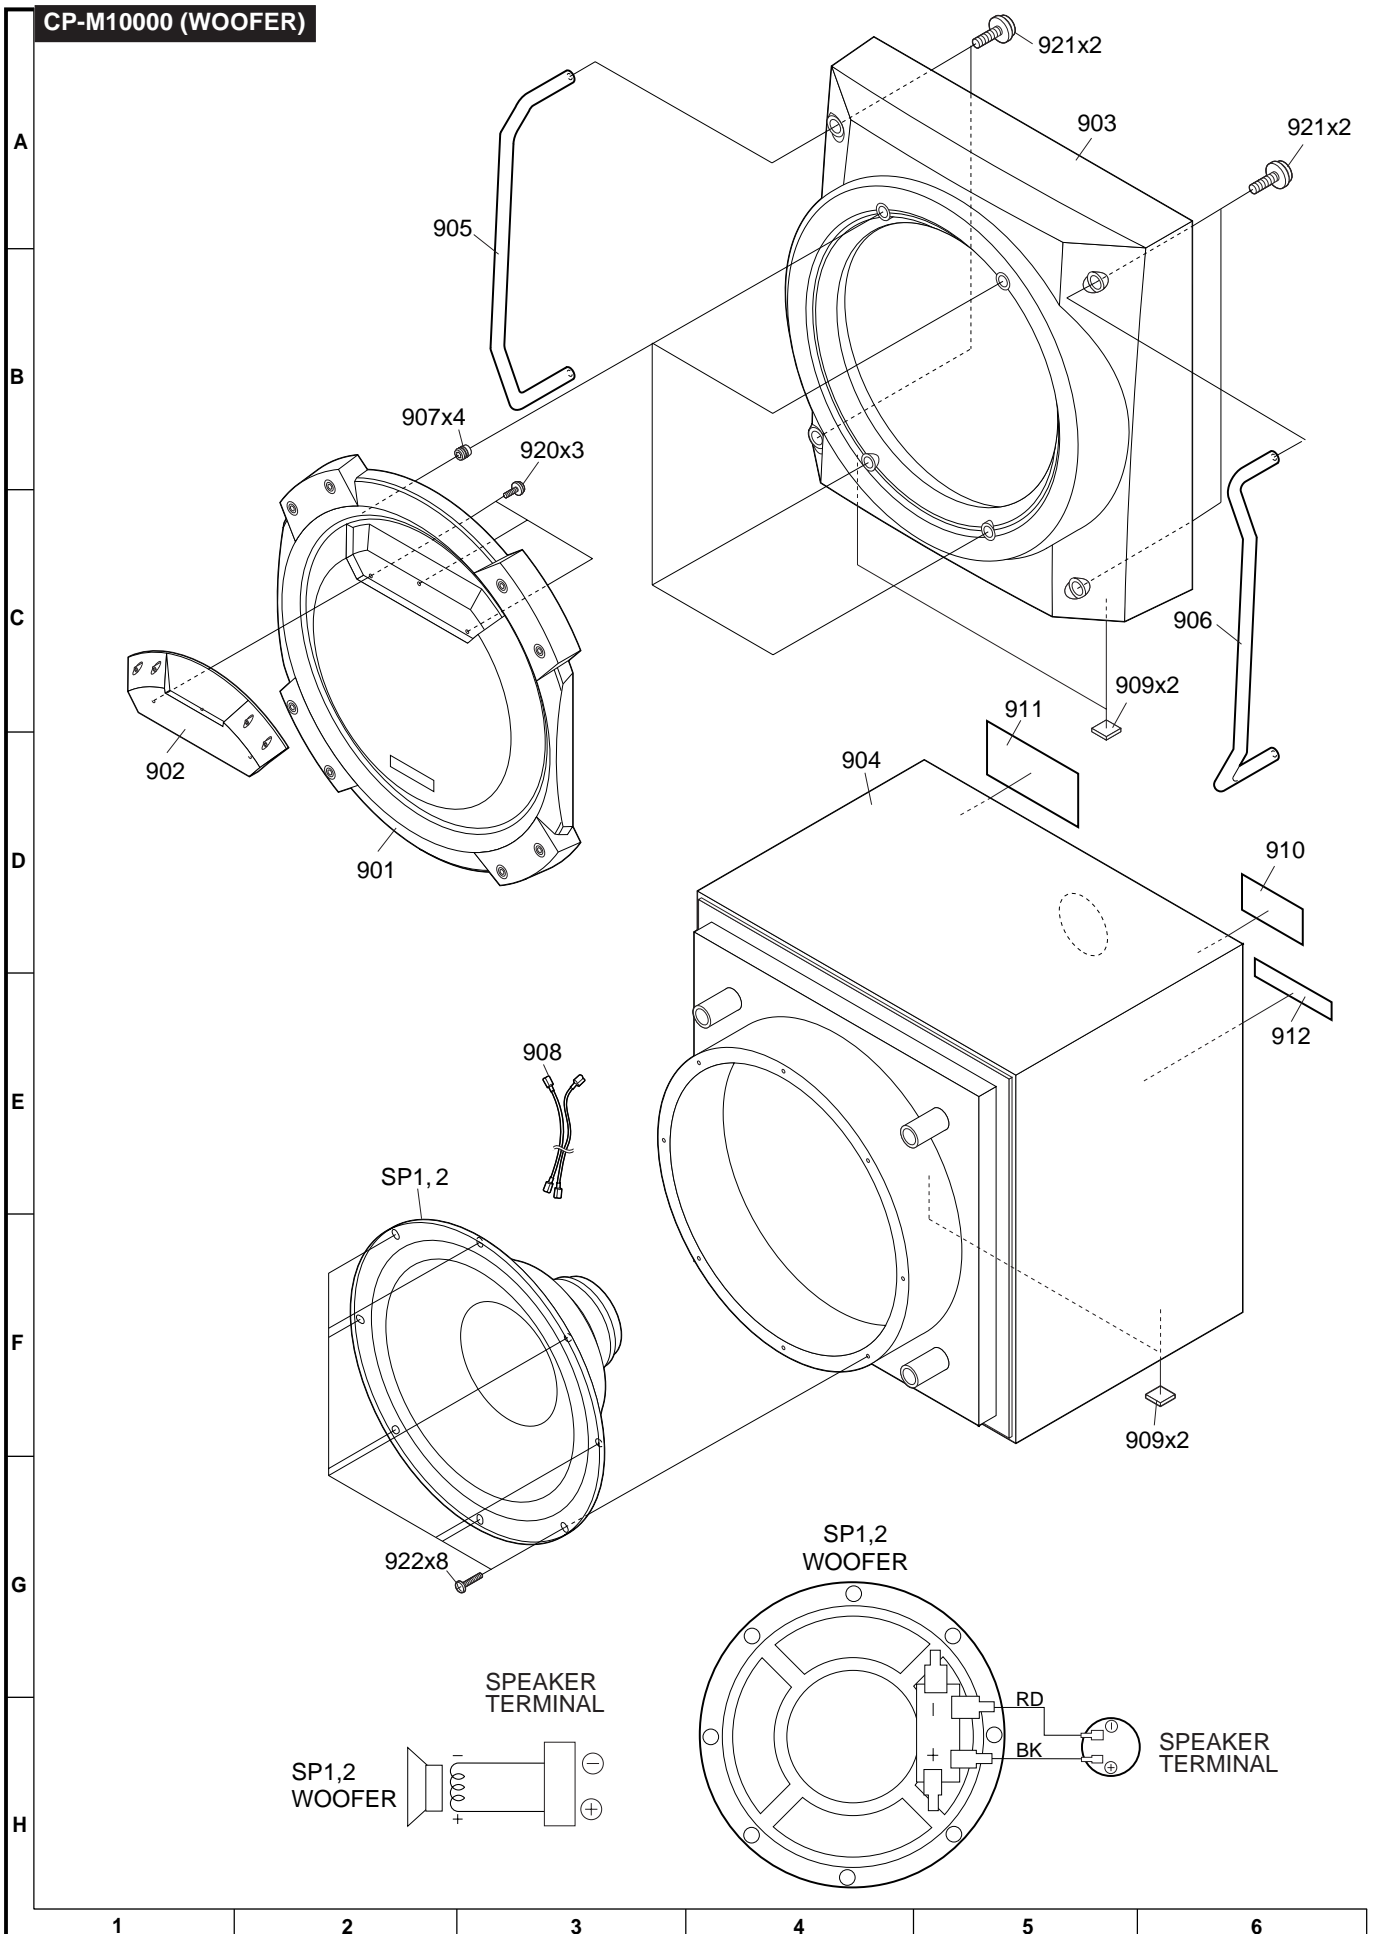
SPEAKER EXPLODED VIEW (1/2)
